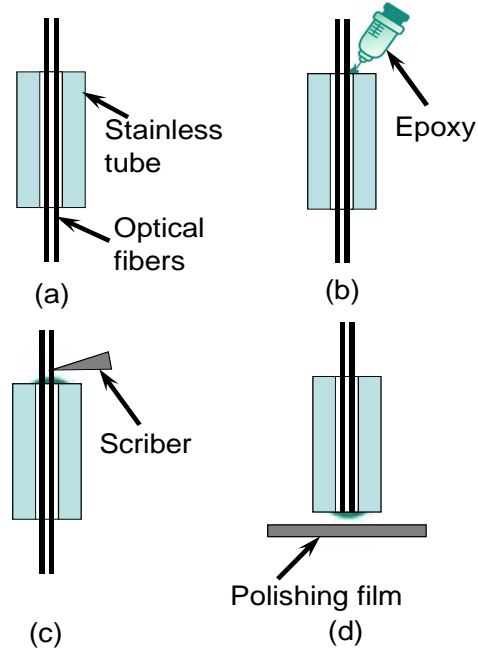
Sensor probe packaging; (a) fiber alignment; (b) epoxy injection; (c) fiber cleaving; (d) sensor probe polishing.
